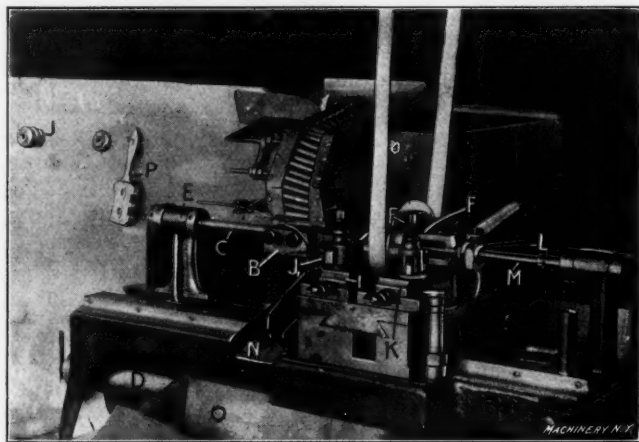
Trimming Machine for Trimming the Head and Mouth, and for Trimming the Shell to the Desired Length
